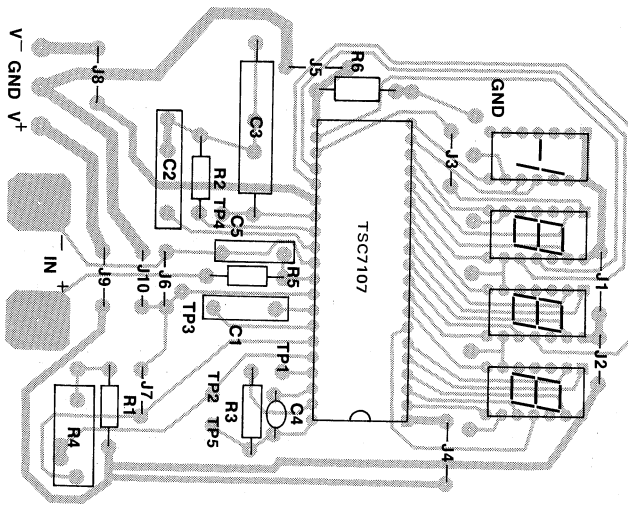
TSC7106 – Circuit Board Layout and Component Placement
